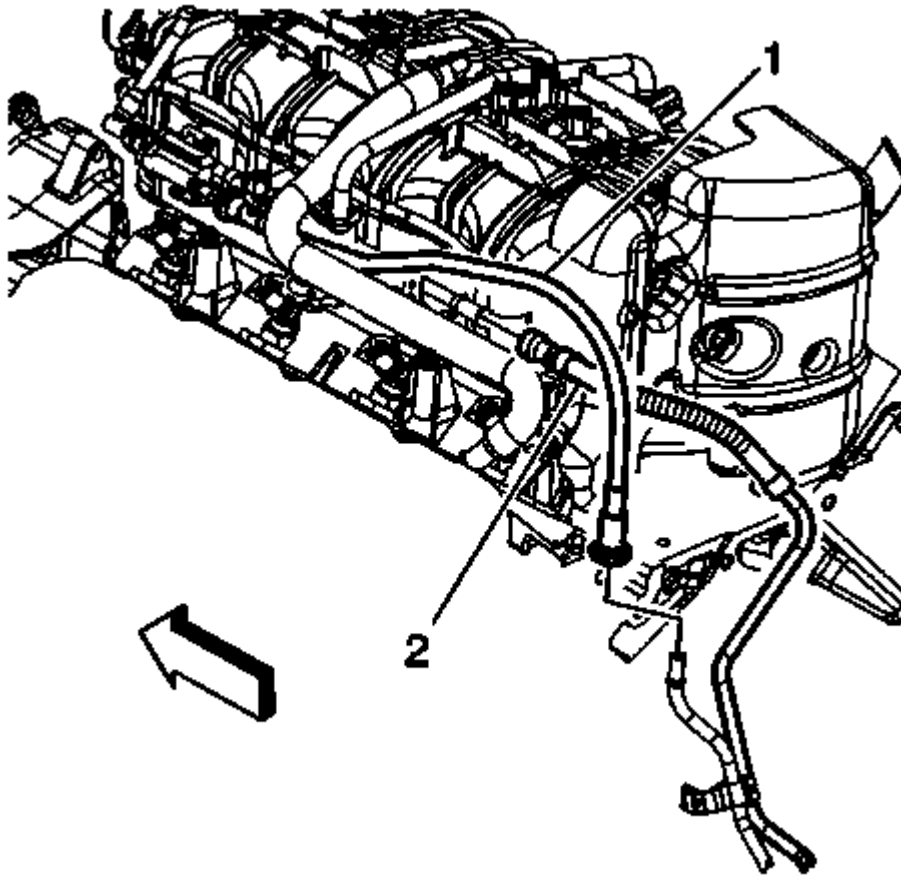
View Of Brake Booster Vacuum Hose & Booster Fitting
